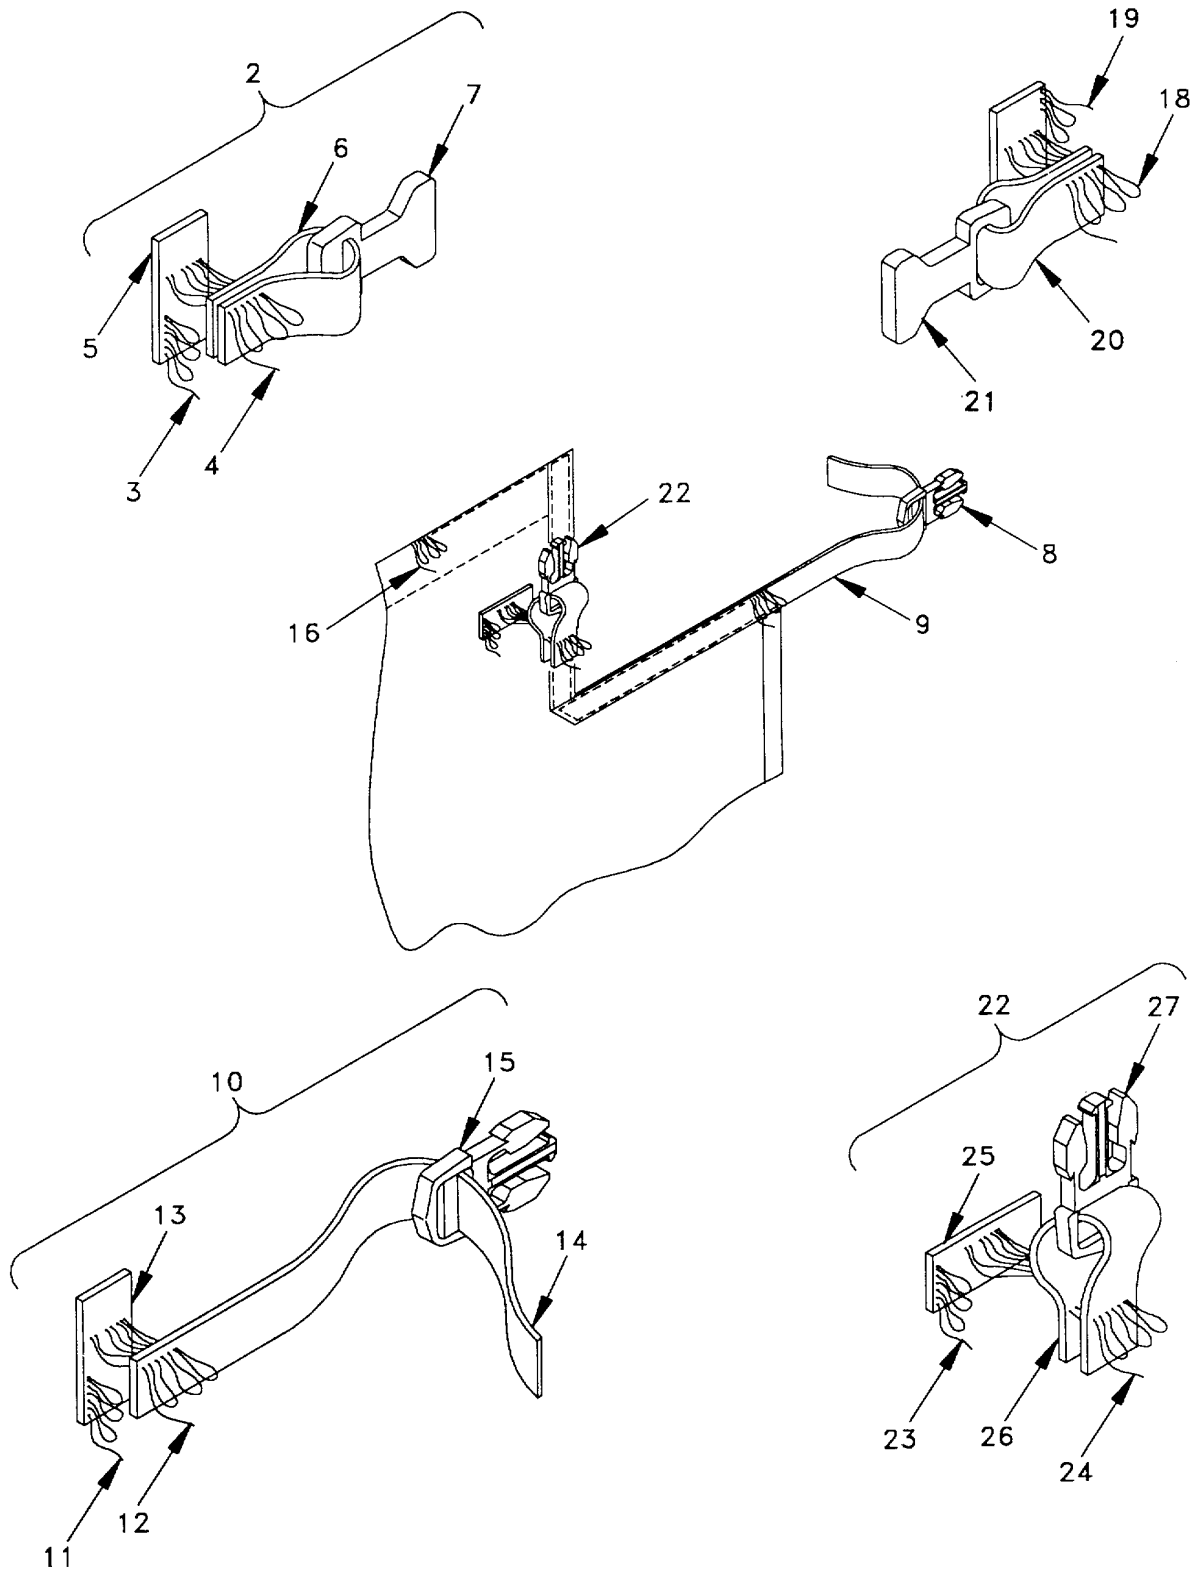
Plain Wall Liner Assembly (Sheet 2 of 2)
